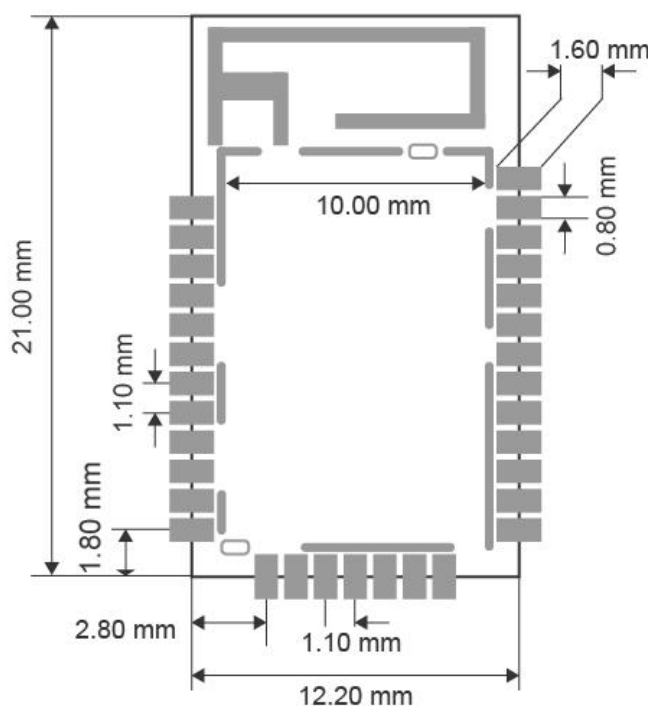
Recommended PCB Footprint of PAR2801-Q32P
